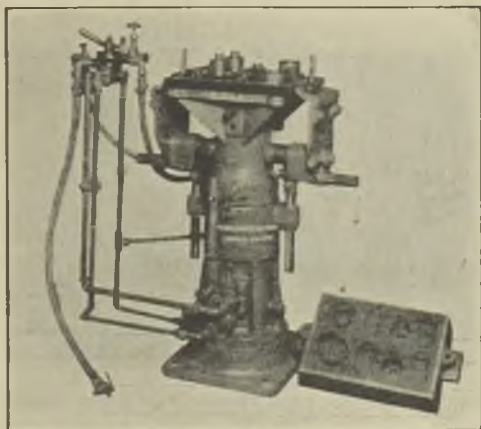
No. 1 AJAX PATTERN DRAWING MACHINE.
